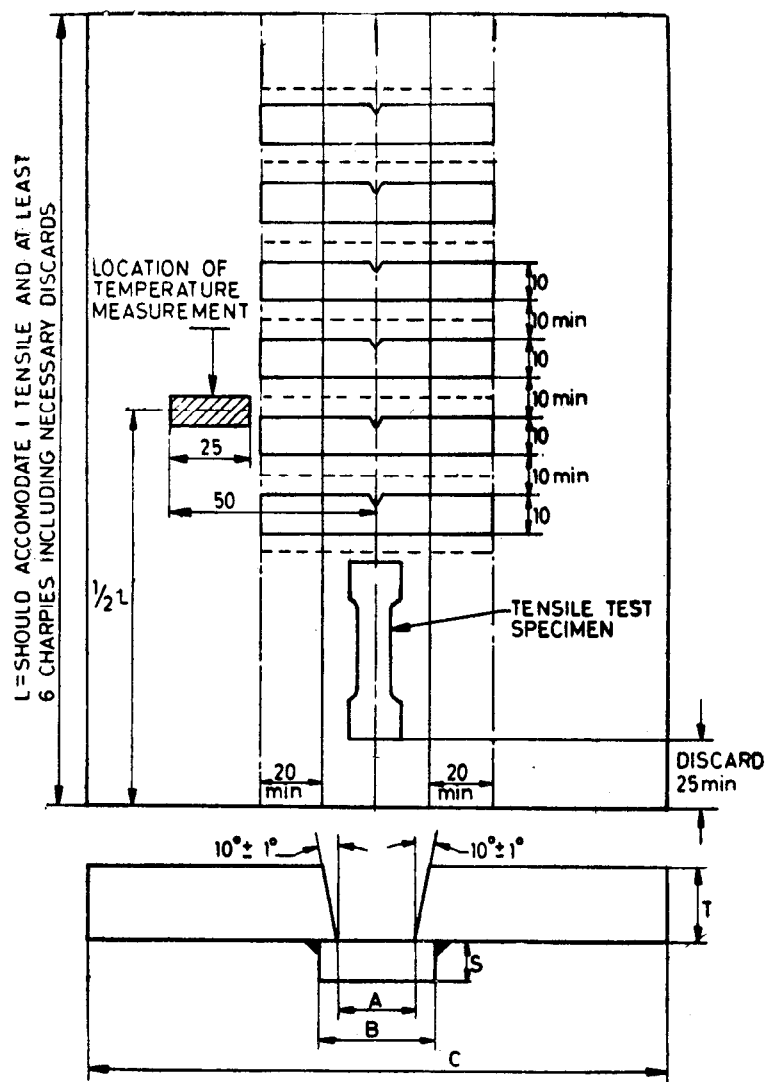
DIMENSIONS OF TEST ASSEMBLY AND POSITION OF CUTTING OF TEST PIECES
